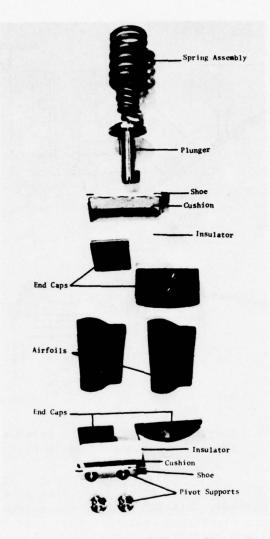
Exploded View of Three-Piece Vane Assembly and Associated Mounting Parts
